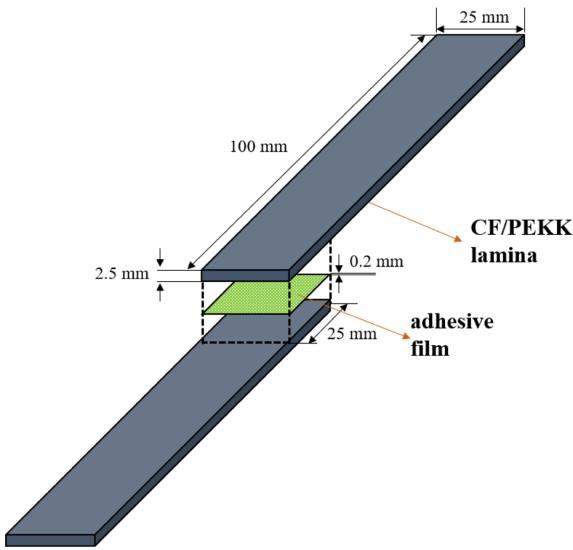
Dimensions of CF/PEKK lamina bonded by oven welding process
